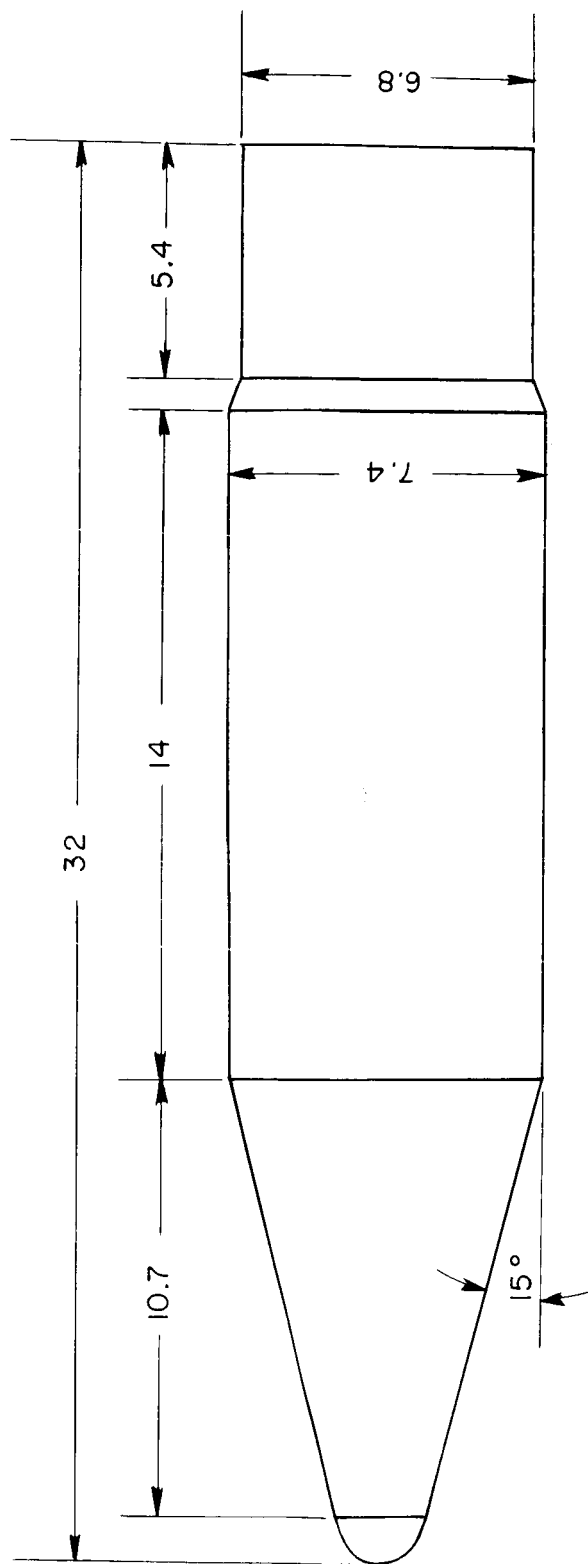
External dimensions of the third-stage plastic rocket container. All dimensions are in inches.
